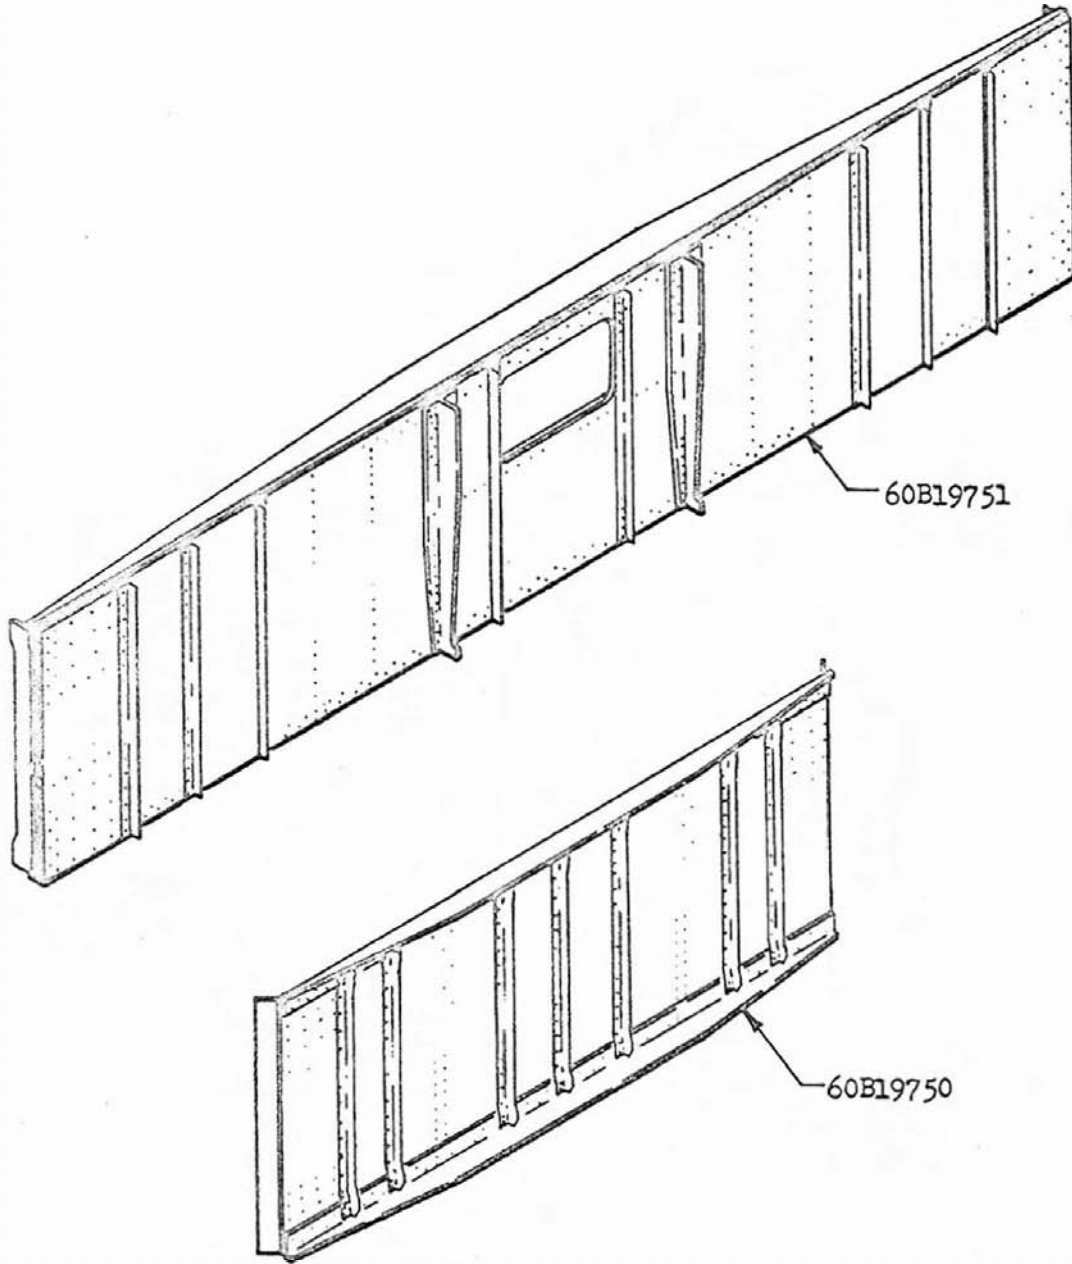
Short Beam Assembly 60B19750 and Long Beam Assembly 60B19751
